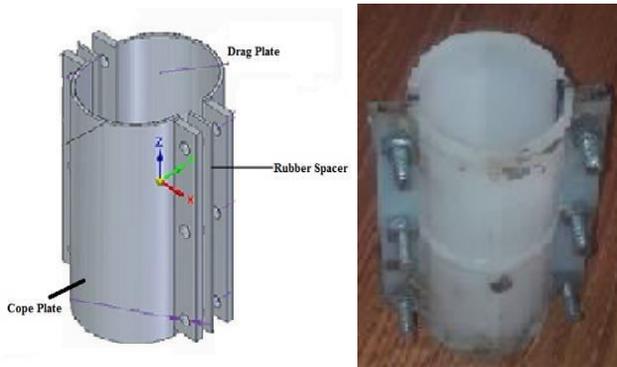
Outer core or Cope and Drag plates of Compression Cum Extruder Die Type Equipment
